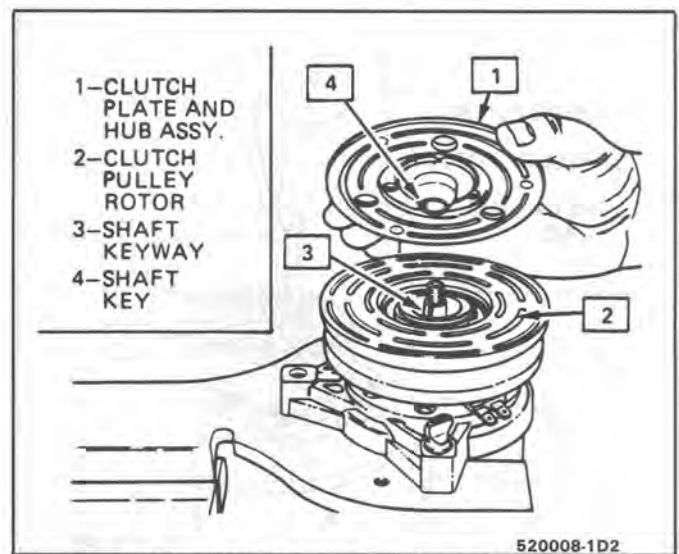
Shaft Key, Clutch Plate/Hub Installation
